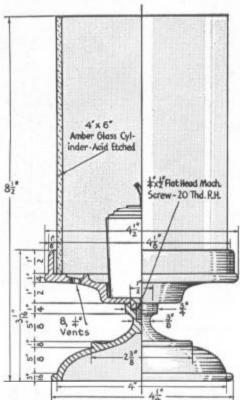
Drawing Showing Finished Dimensions for Making Hurricane Candle Stand.
